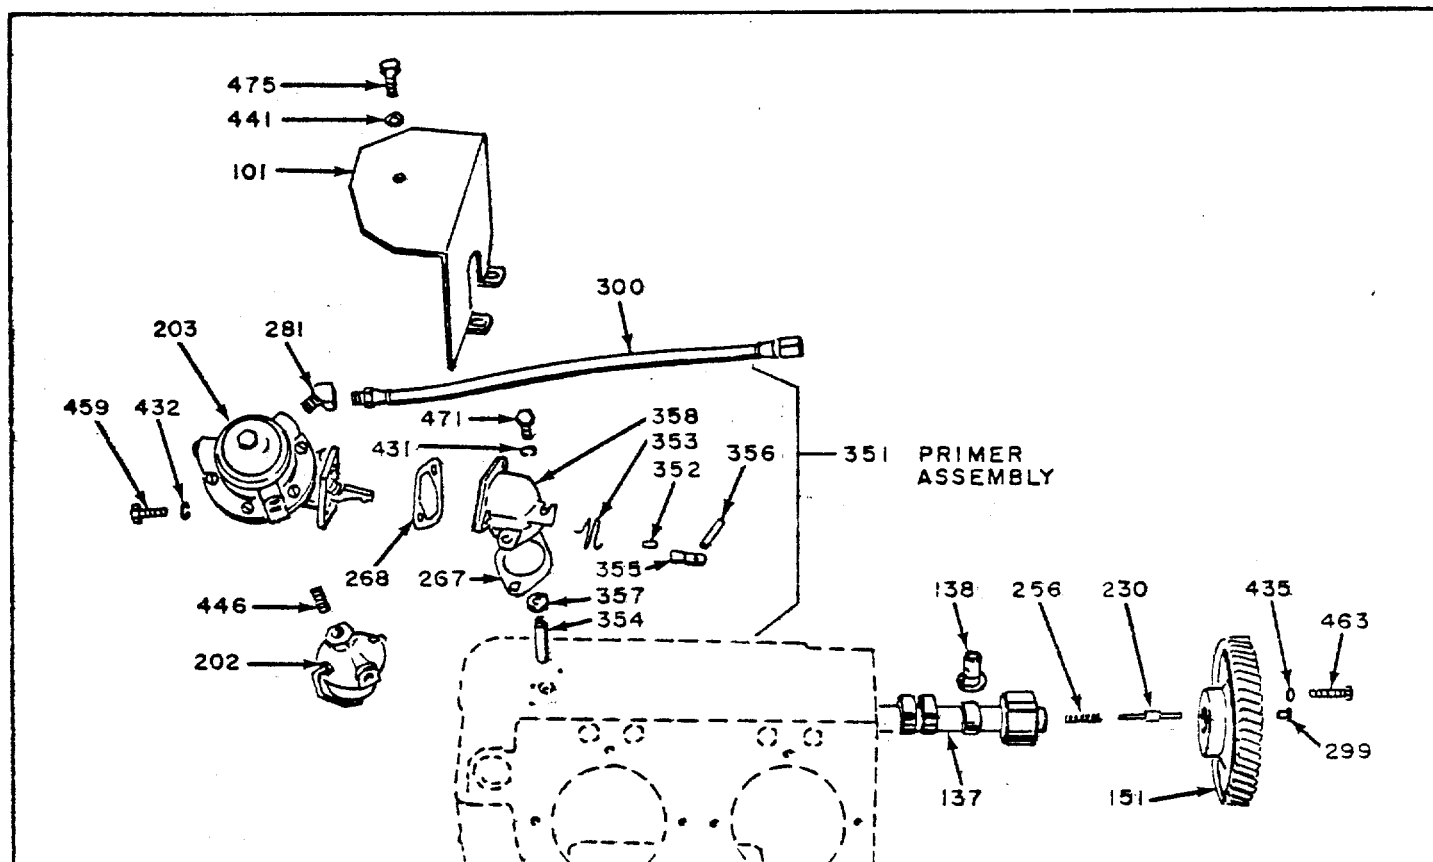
CAMSHAFT AND FUEL PUMP MOUNTING GROUP
